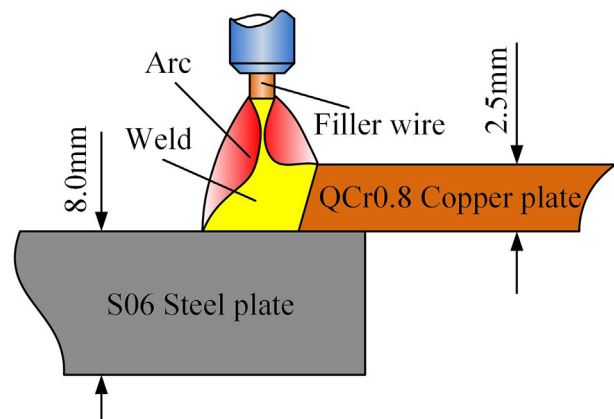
Schematic of CMT welding-brazing process.
